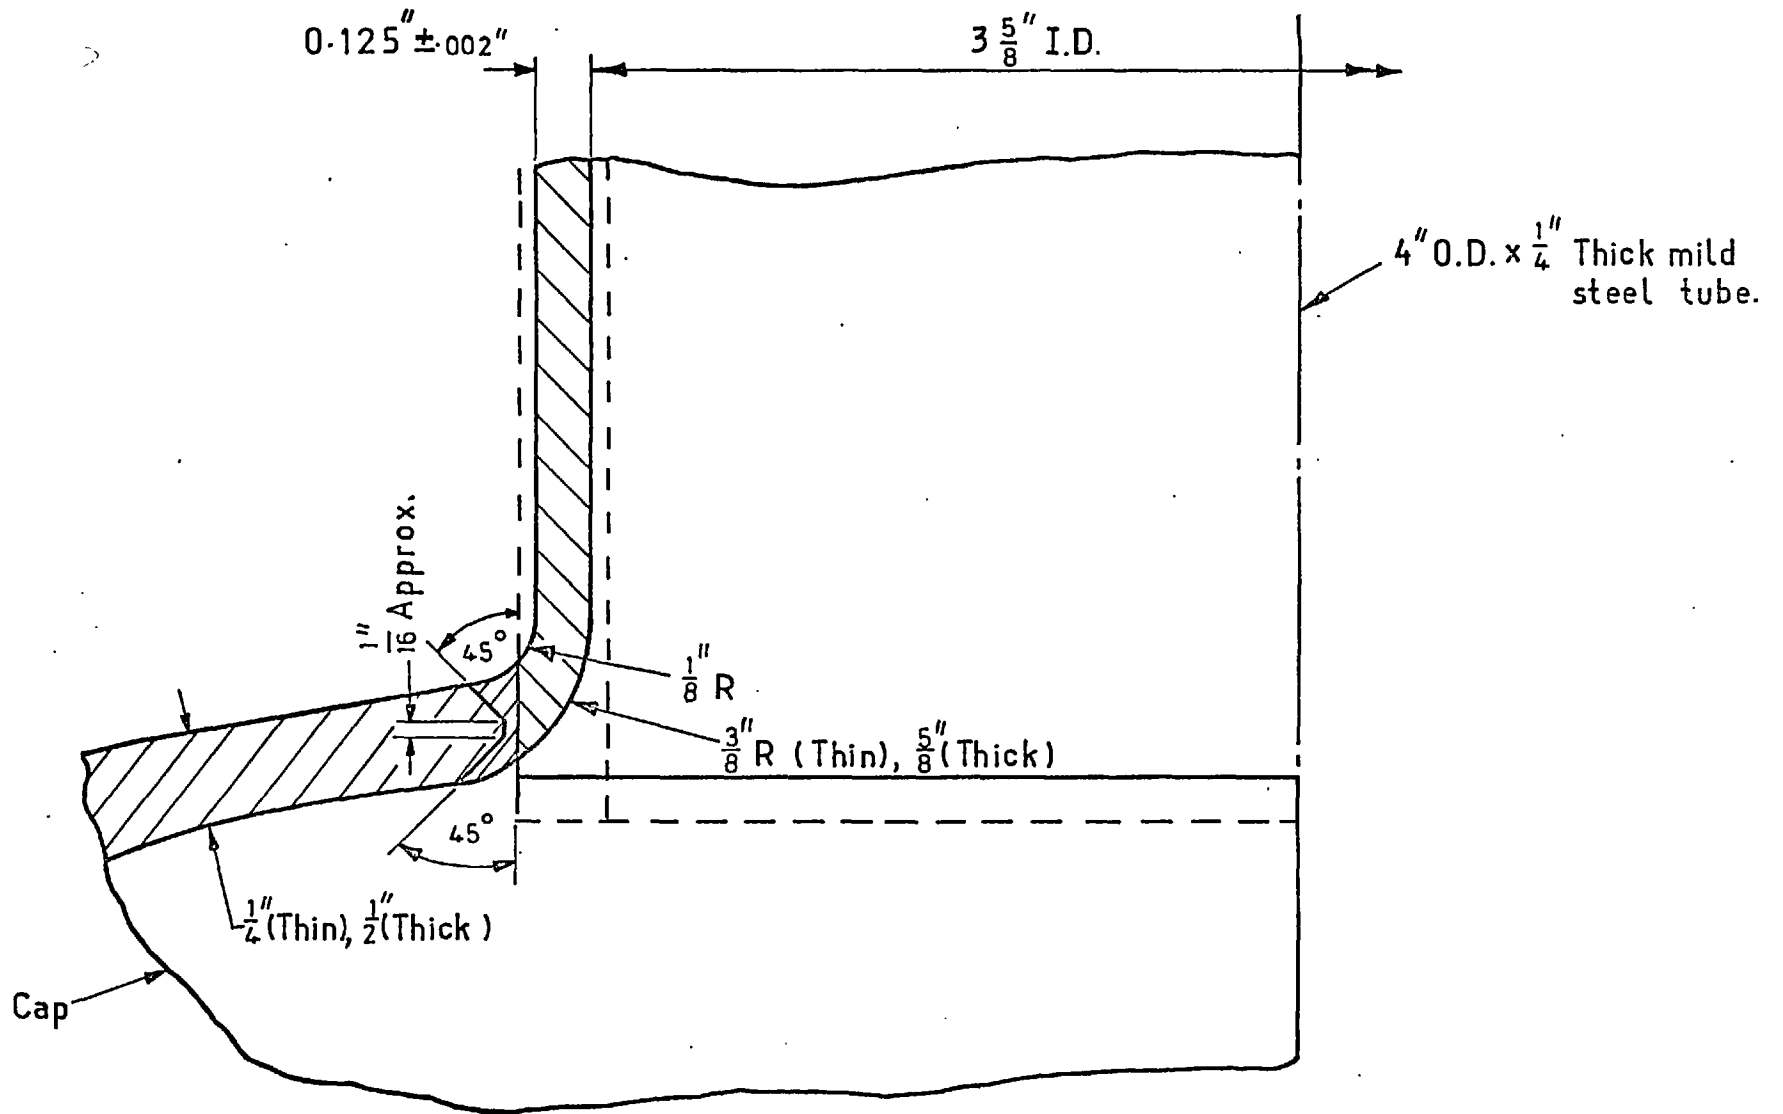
WELDING AND MACHINING DETAILS OF NOZZLES.
